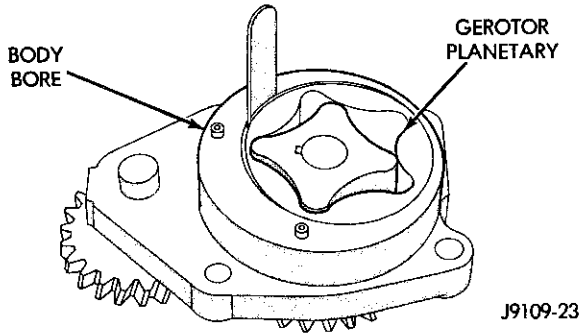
Measuring Gerotor Planetary to Body Bore Clearance
